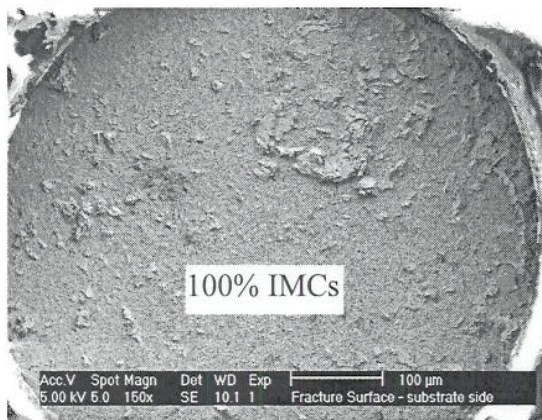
Fracture surface of the solder joint ( substrate pad sided) for a 2.8  $\mu\text{m}$  thick Ni and a 1.3  $\mu\text{m}$  thick Au layer aged for 500h at 150°C.
